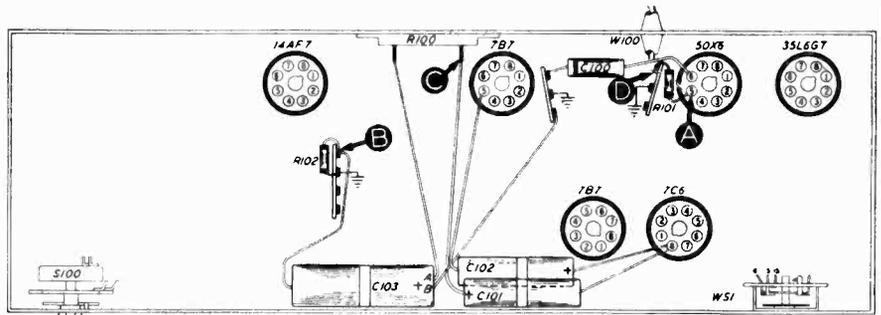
Bottom View, Showing Section 1 Test Points TP-3395A
